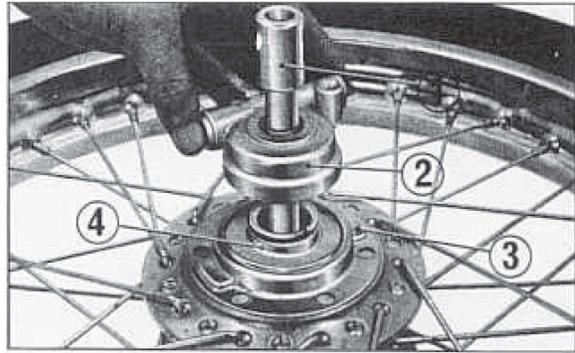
(1) Front wheel axle (3) Gear box retainer cover
